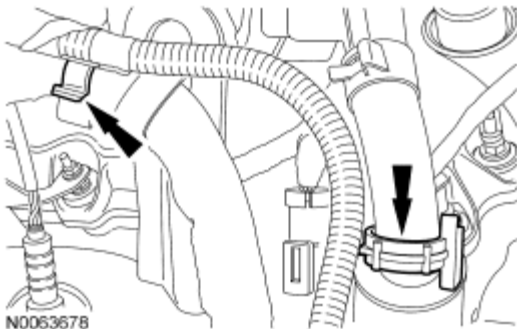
Identifying Block Heater Wiring Harness From Engine
